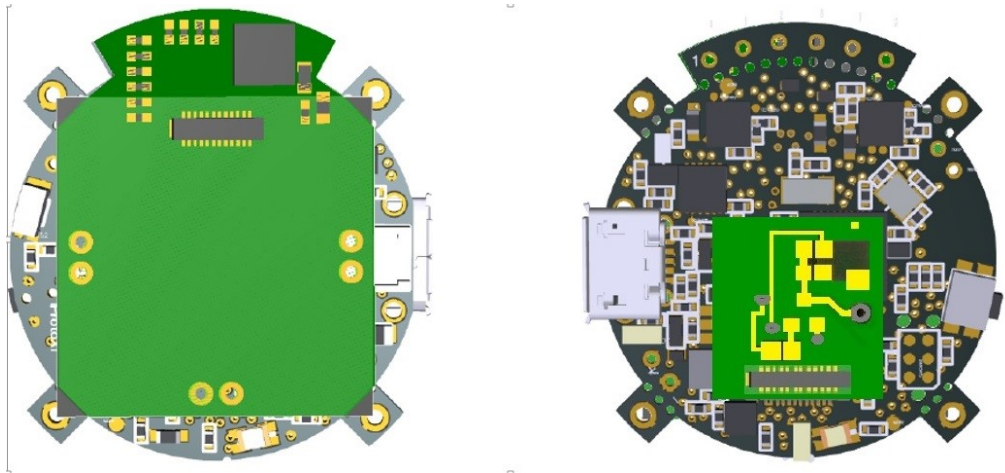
Left- gas sensor layer with external components at the top, right-notification driver board at the bottom.
